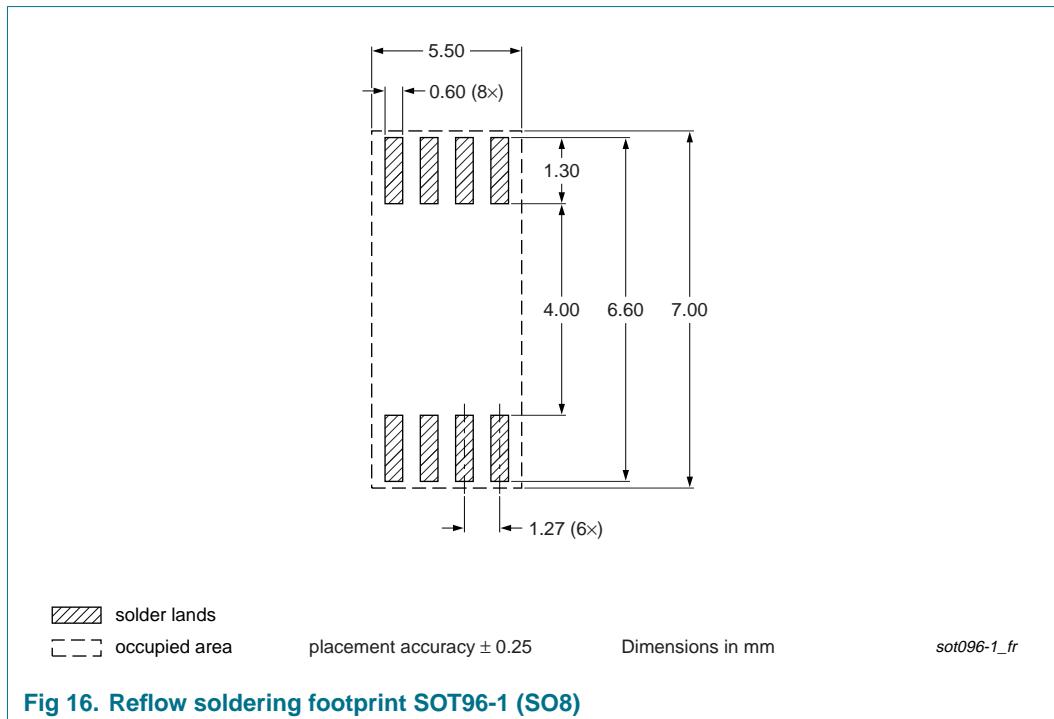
Reflow soldering footprint SOT96-1 (SO8)
